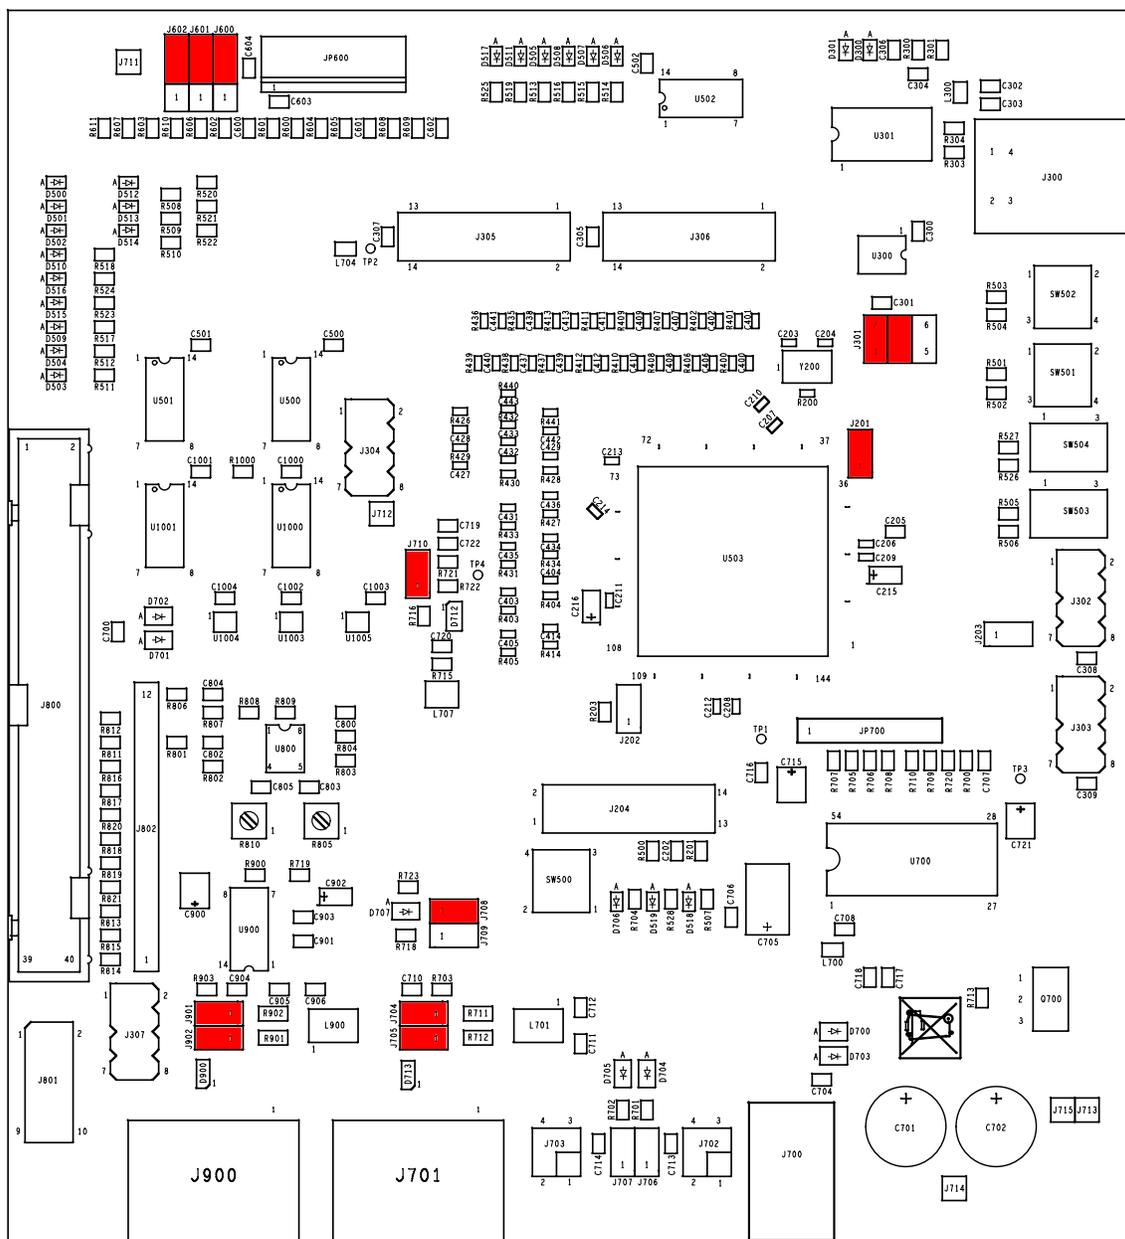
MPC560xB Controller Board Jumper Position and Default Setting
